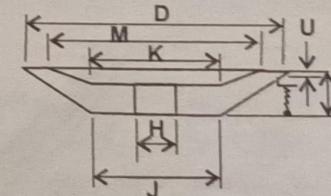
Dish or type 12 wheel, similar to type 11, but with a narrow, straight peripheral grinding face in addition to the wall grinding face. This is the only wheel of those shown that is considered safe for both peripheral and wall (or rim) grinding.
